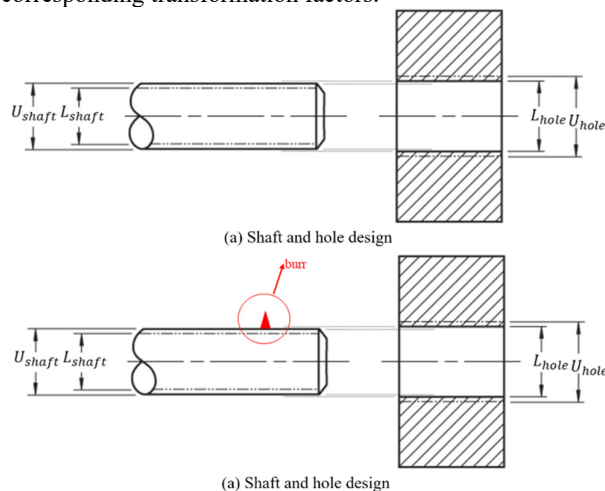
Tolerancing design for shaft and burr design: (a) original tolerance design; (b) one small out-of-tolerance burr on the shaft, while the overall average radius of the shaft is in-tolerance
